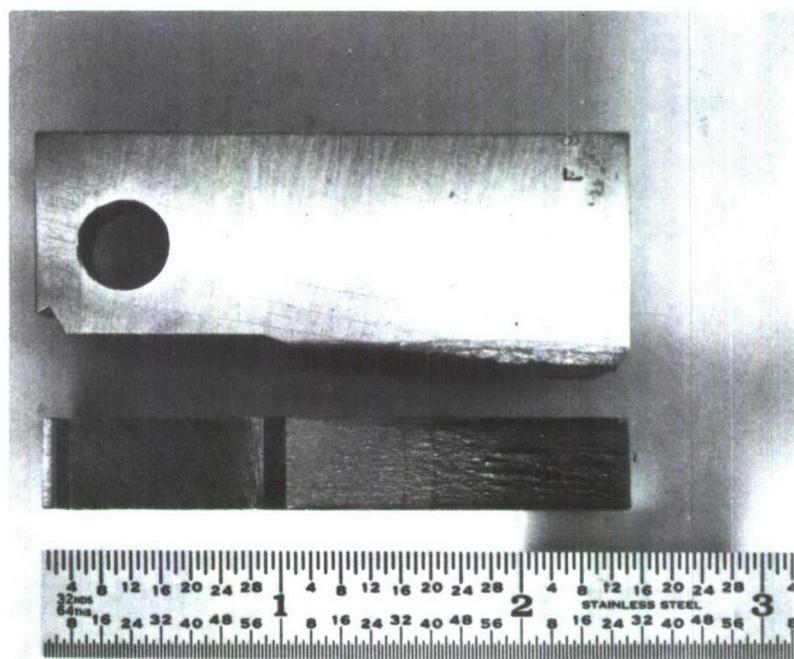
Fracture Surface of a Fatigue Crack Growth Rectangular DCB Specimen Tested in Laboratory Environment
